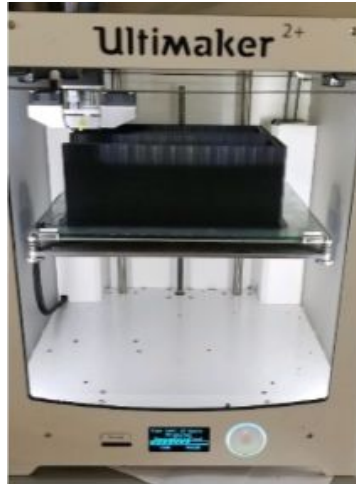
The side sensor housing being 3D printed in the Ultimaker 2+.
